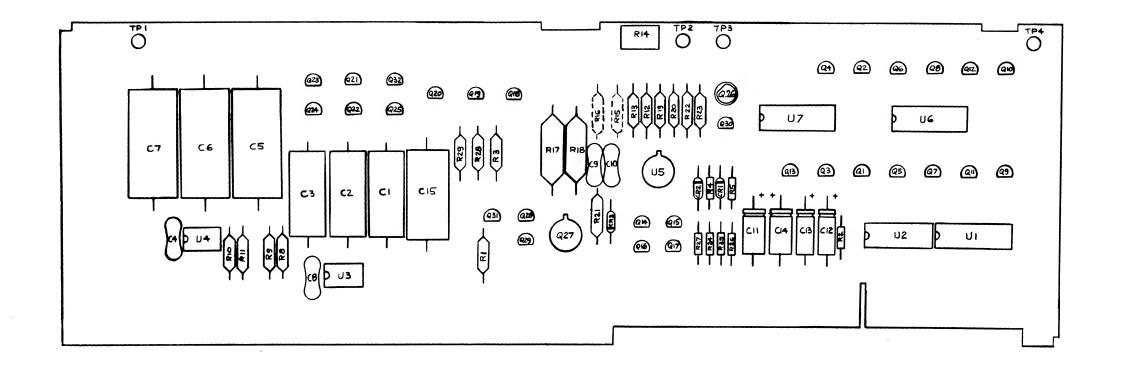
A8 DC Signal Conditioner PCB Assembly (cont)
